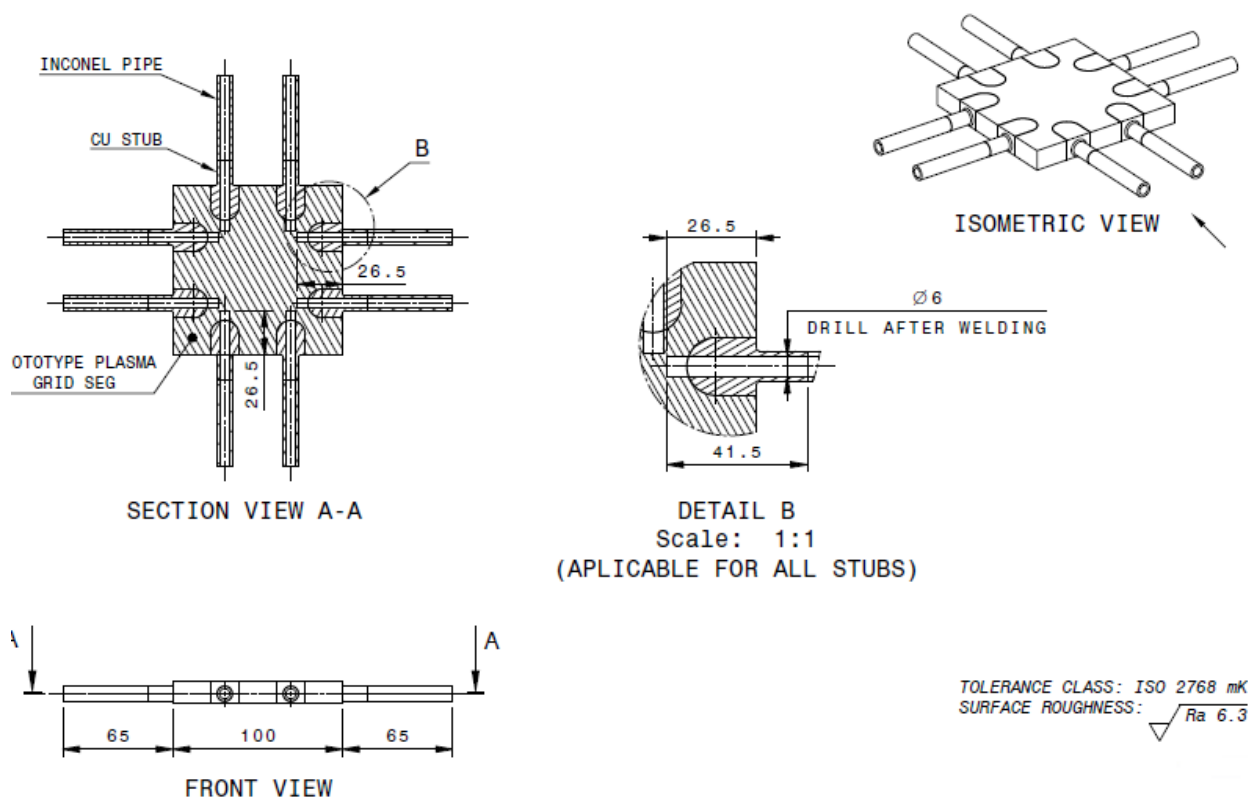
Prototype EB welded transitions for Plasma Grid (drawing # 04-00)
